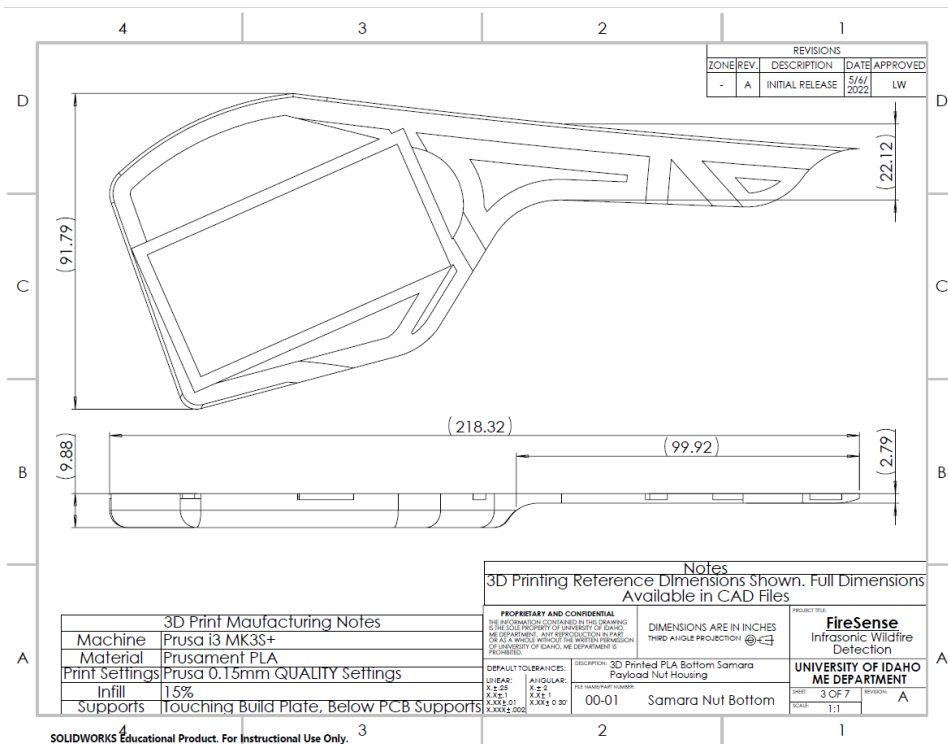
Technical Drawing Package Sheet 3, Samara Nut Bottom
